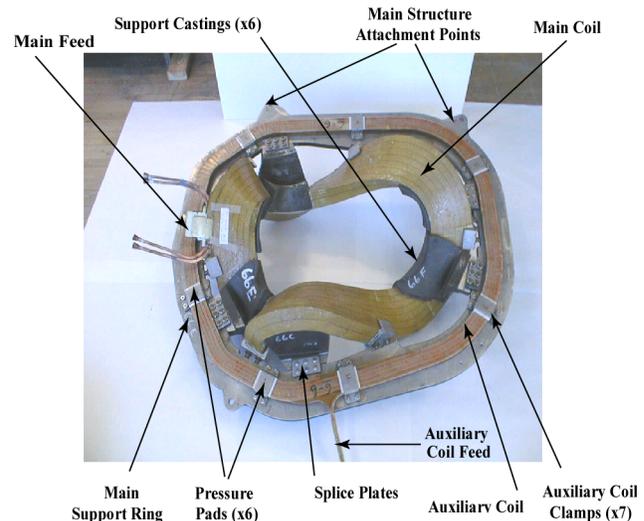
Assembled coil module showing the main modular coil, the auxiliary coil and supporting rings, and castings.
